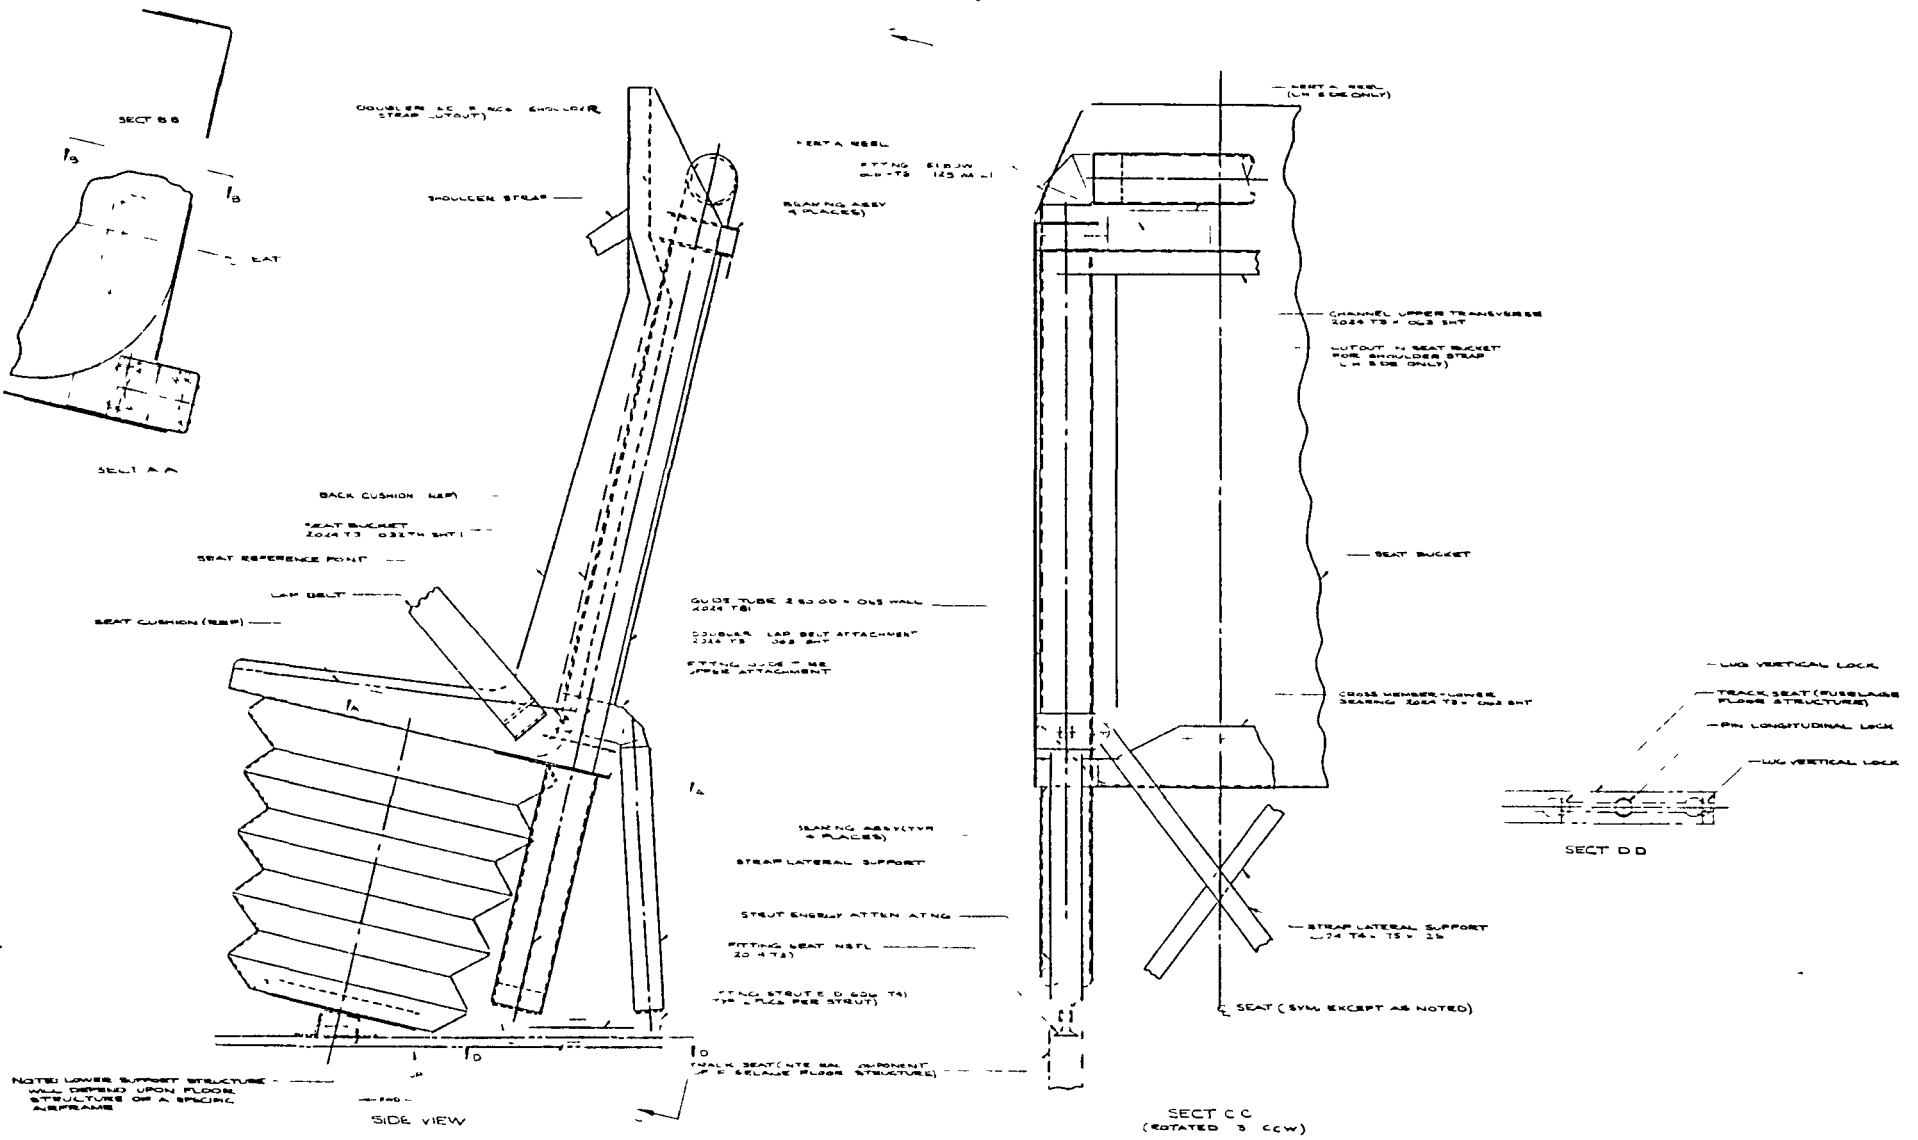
Preliminary bellows-equipped seat, Drawing No. SK10077.
